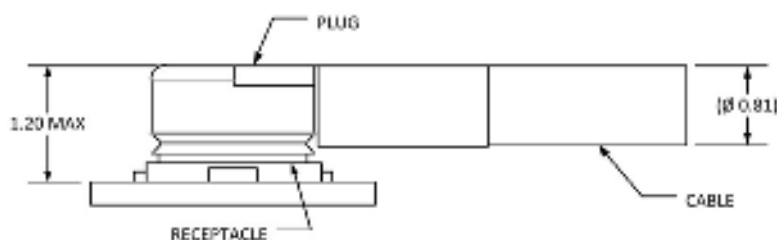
0.81 mm coaxial cable snap-in RF connector dimensions
